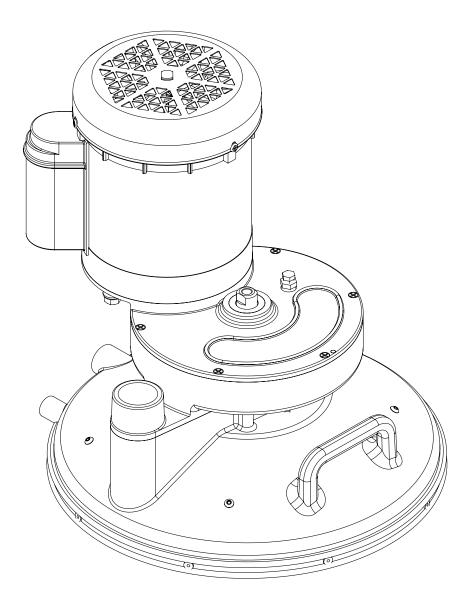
Base and Drive Train Assembly - View 1 of 2 604-054-107 Rev. A
